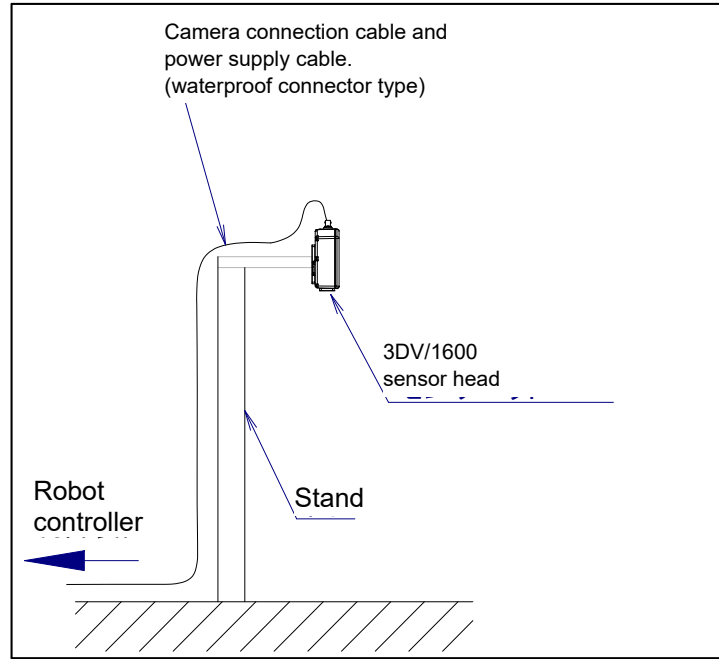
(b) Wiring of the 3D Vision Sensor (fixed camera)
